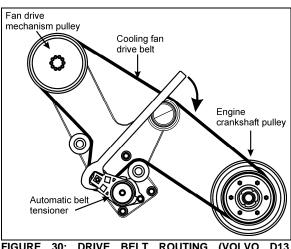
DRIVE BELT ROUTING (VOLVO D13 ENGINE)
